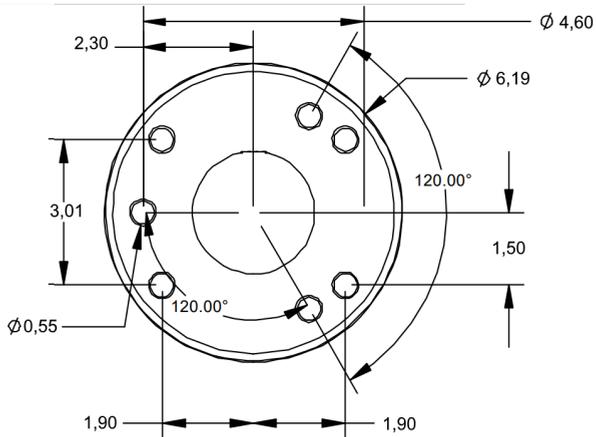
Bracket dimensions (in cm) on the vehicle side
